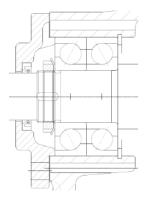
Back to back arrangement of Angular contact bearings at DE end
